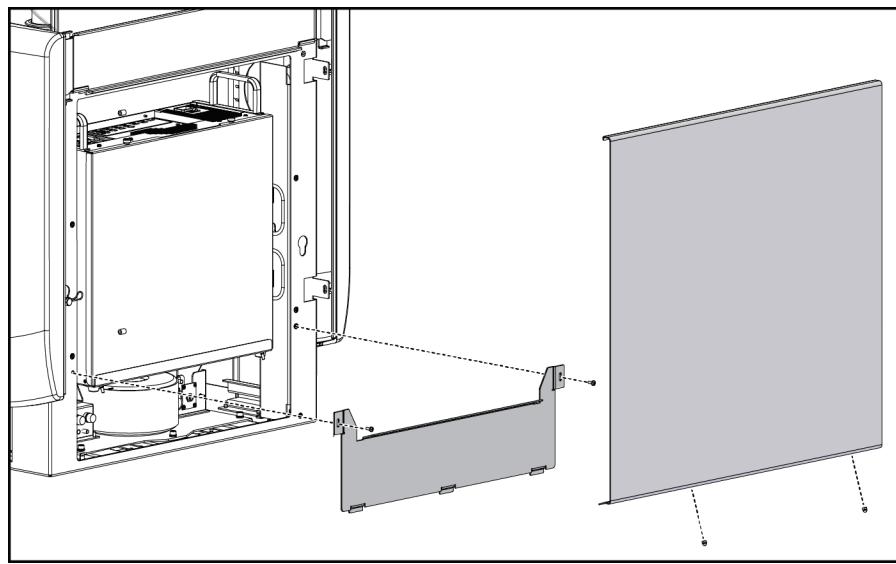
Removing rear cover (right) in order to remove lower rear panel kick plate (center)
